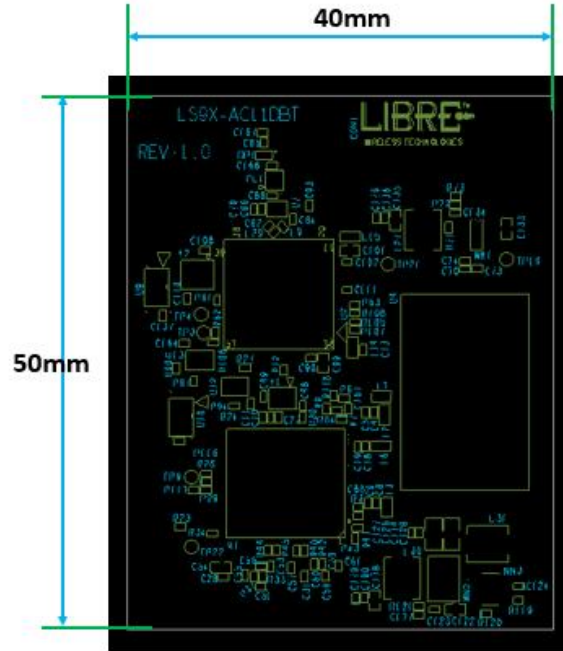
LS9X-AC11DBT MODULE Top View Mechanical Dimension
